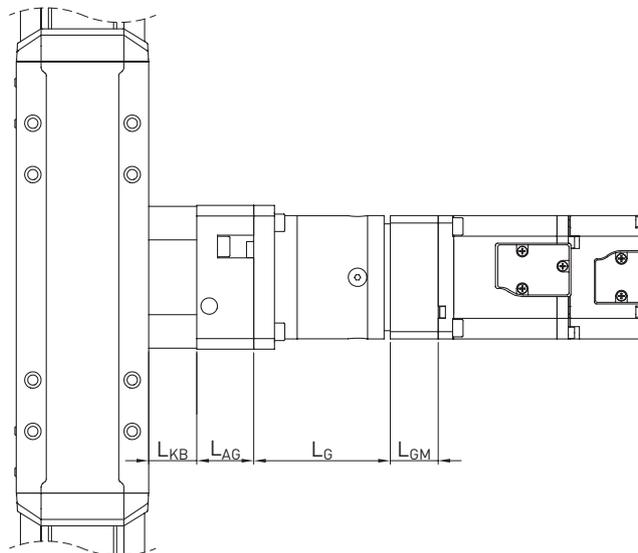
Cantilever axis HC-B motor connection with gears
